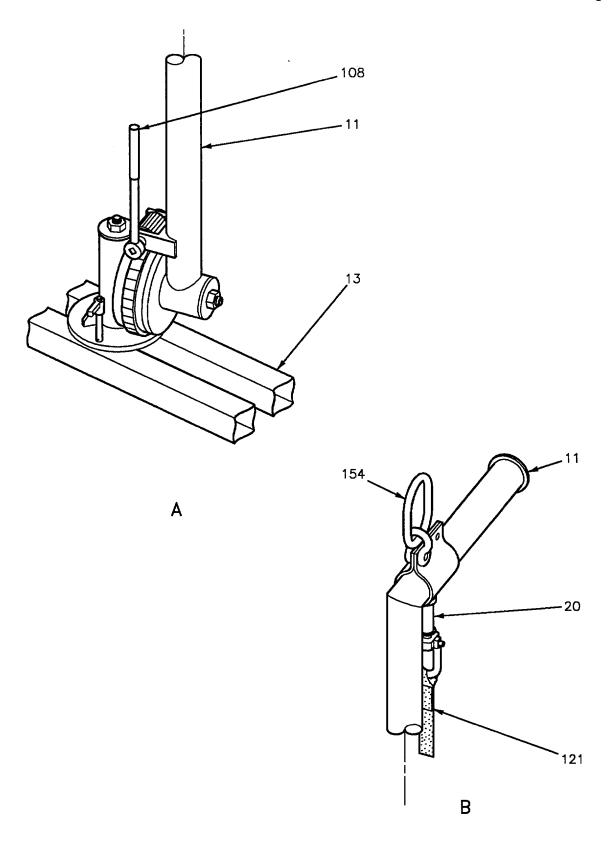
Loading Skin into RE174110004, Inner Wing Maintenance Fixture (Sheet 2)
